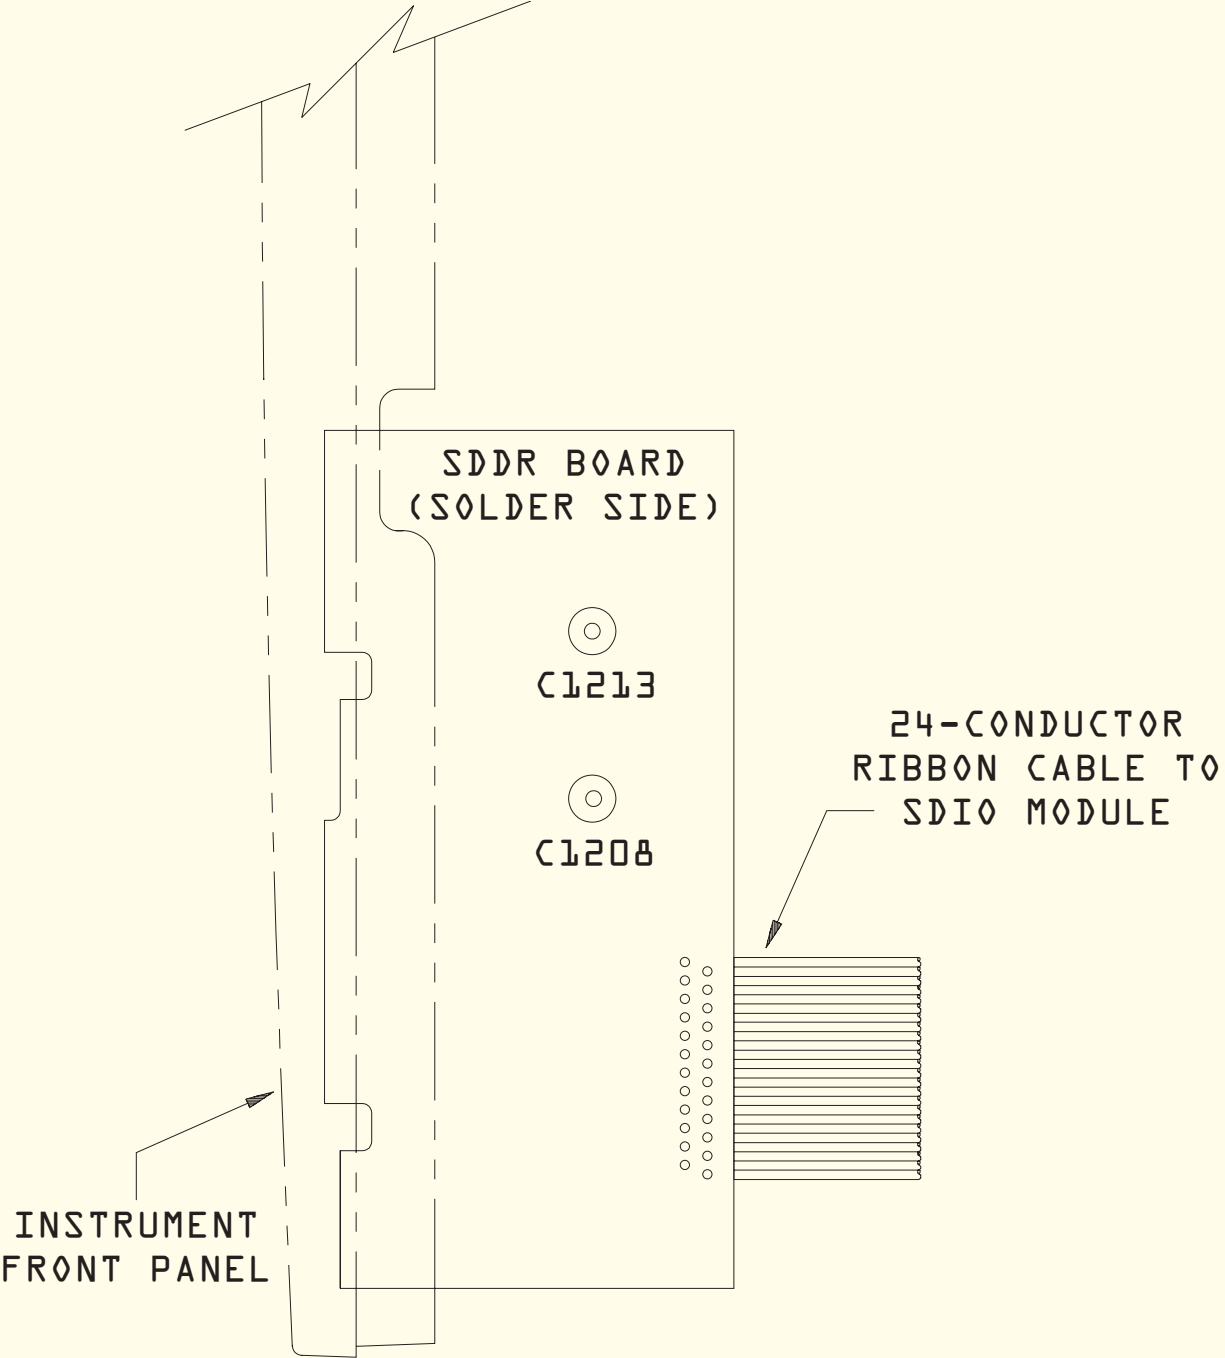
Cascade Plus DDF module adjustment locations (on solder side of board).
